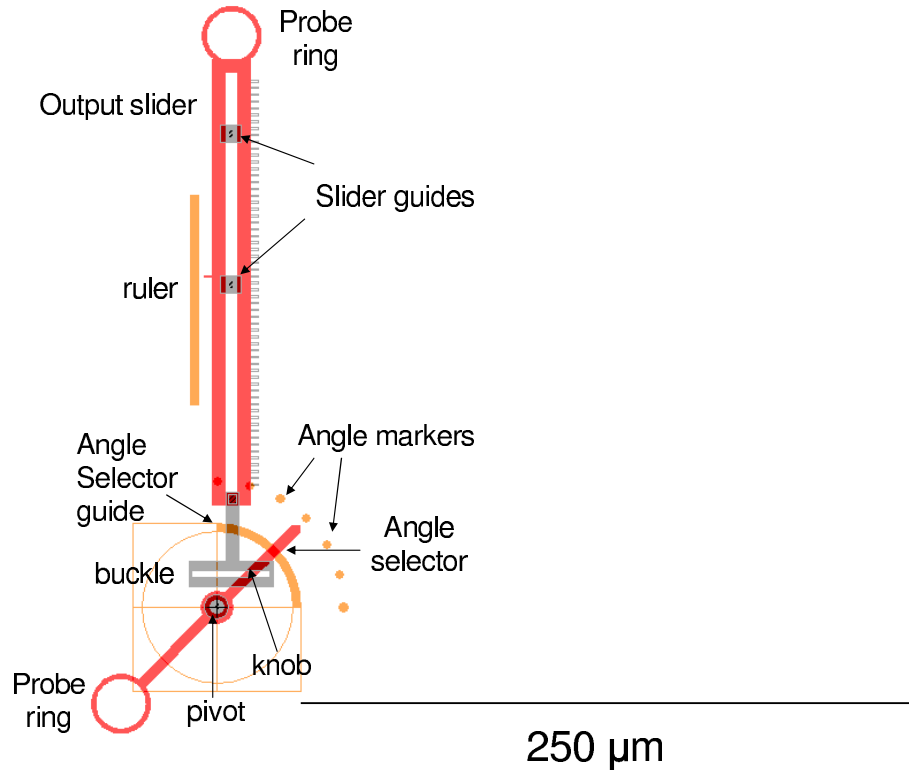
Computer aided drawing of the sine function after assembly post-processing is performed to position the buckle so that it encloses the knob.
